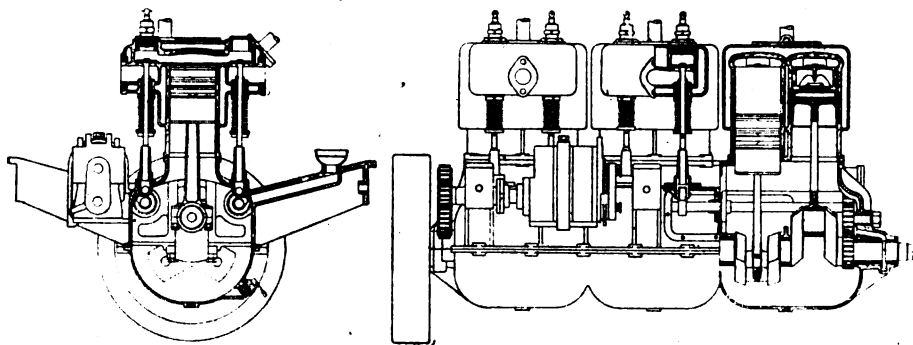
Transverse and Longitudinal Part Sectional Views of Brooke Six-cylinder Motor.
